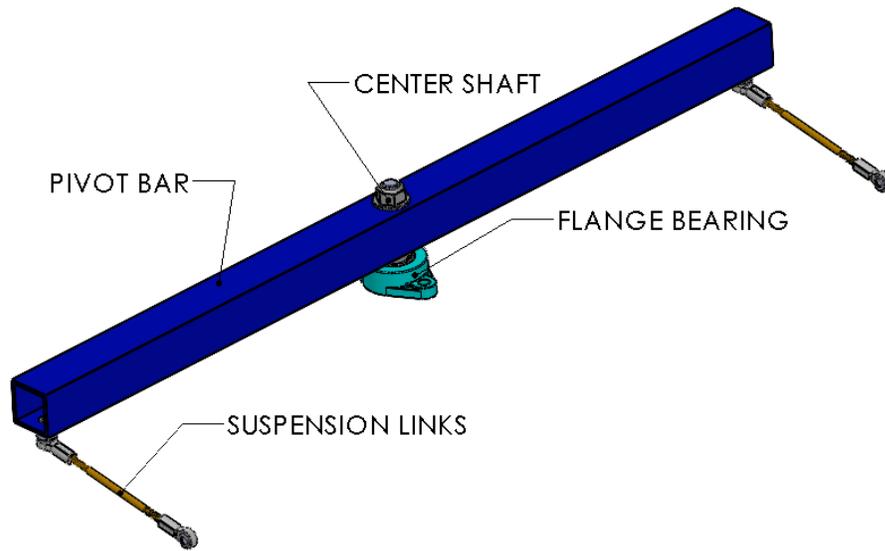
Labeled isometric CAD assembly of the differential subsystem.
